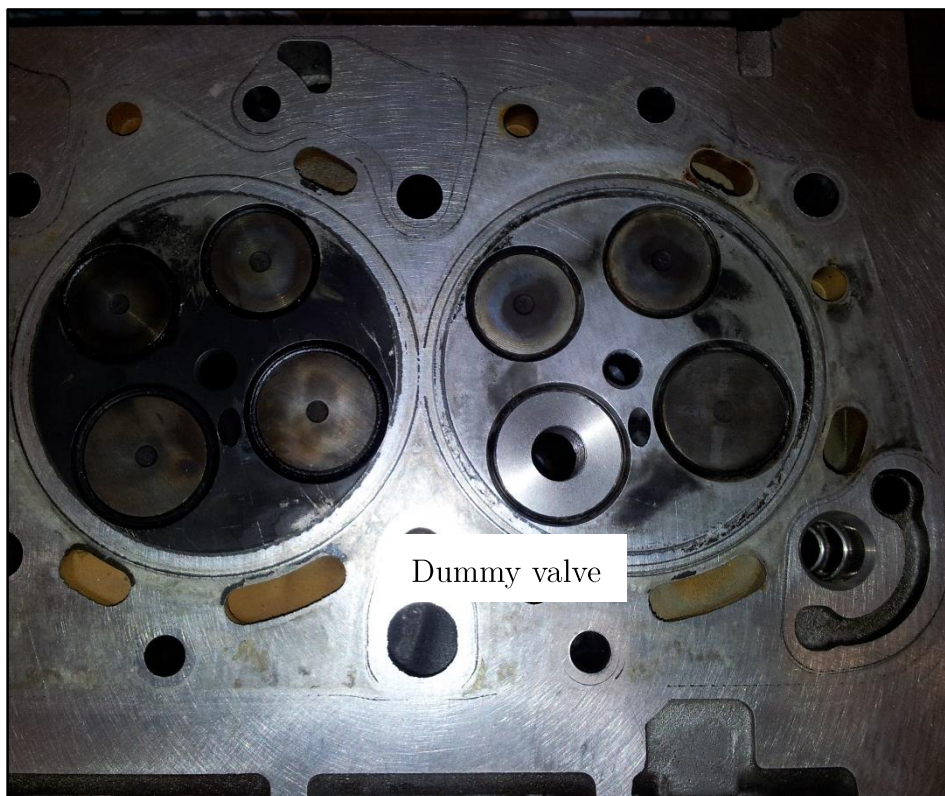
One of the two intake valves on the 1st cylinder of the engine head replaced by a dummy valve with threaded hole for the sampling valve
